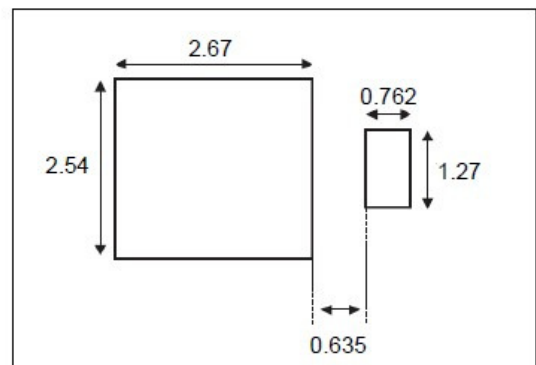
FOOT PRINT DIMENSION Print (mm)
